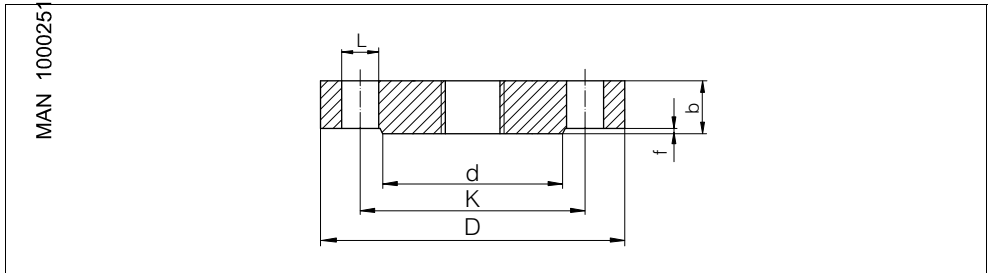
Dimensions - EN flange EN 1092-1 (seal ledge B1)
